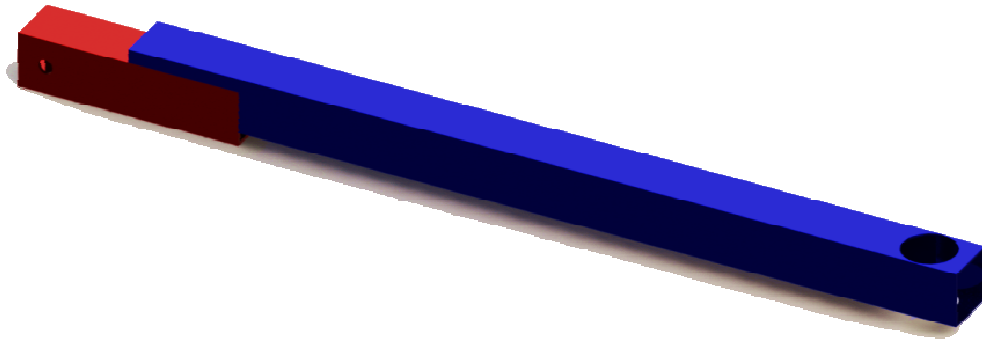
LOWER TRAILER HITCH ATTACHMENT BEAM
